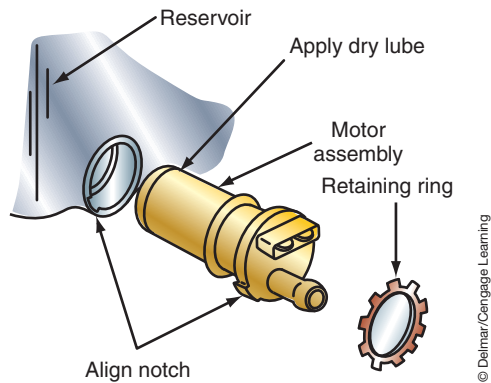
Reservoir-mounted washer pump and motor.
